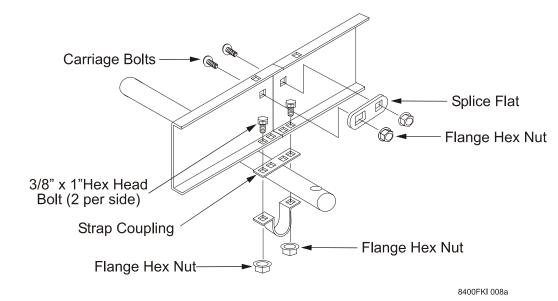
Splice two (2) adjoining sections with Floor Support and Splice Flat.
